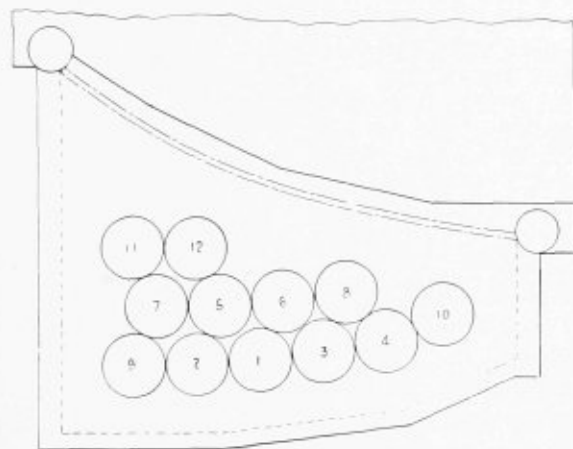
Improved arrangement of burners for boiler shown in Fig. 1
